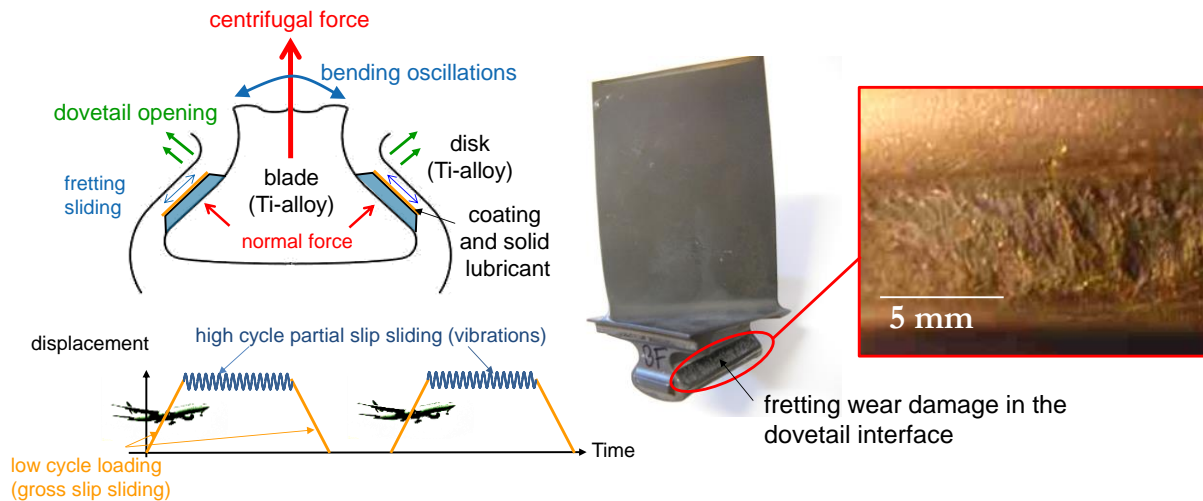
Illustration of fretting wear damage process in turbine engine dovetail interface [4].
